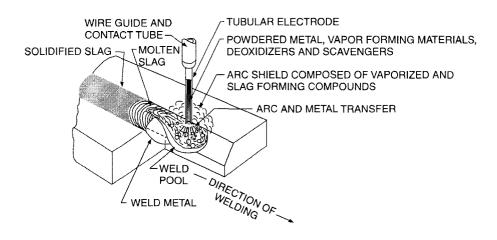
Self-Shielded Flux Cored Arc Welding
